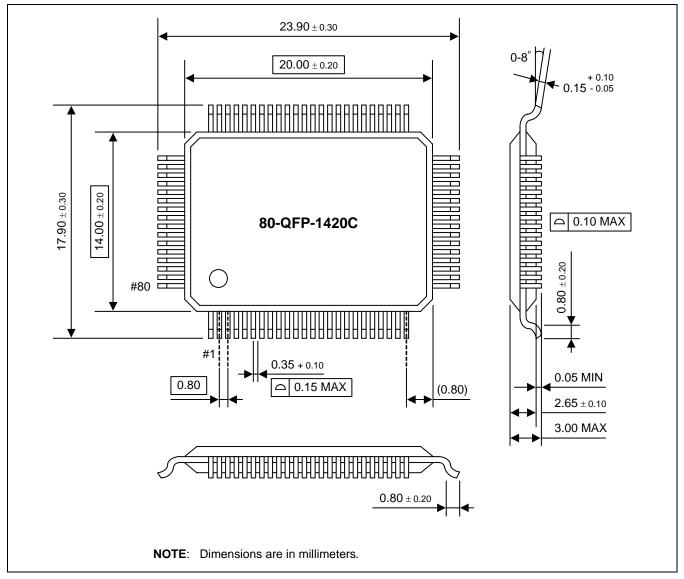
S3C84MB/F84MB 80-QFP Standard Package Dimension (in Millimeters)
